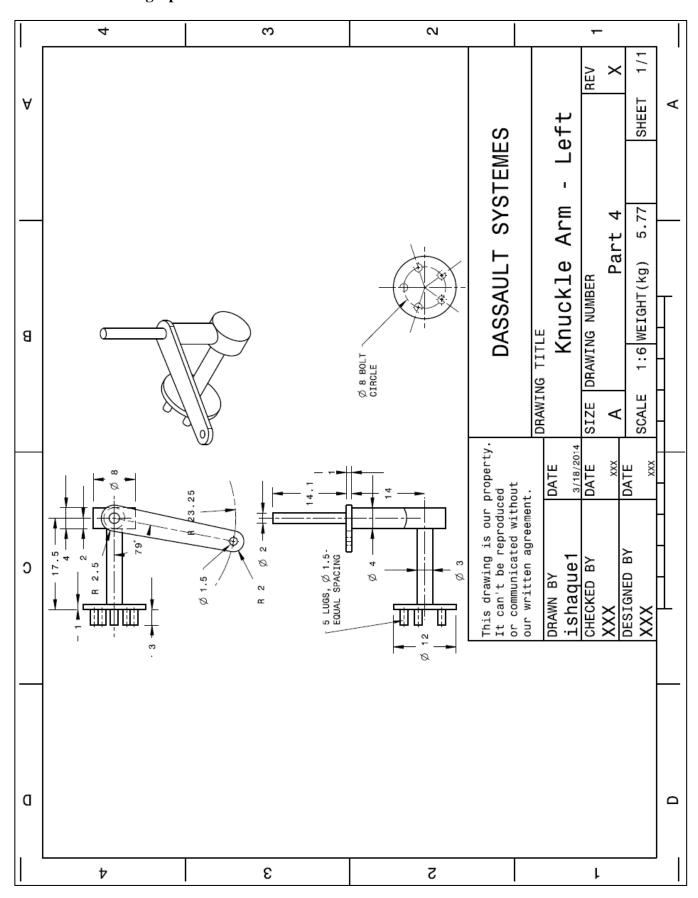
Knuckle Arm-Left (Part 4) of the Steering Wheel Assembly in its isometric view with its materials applied (steel).
